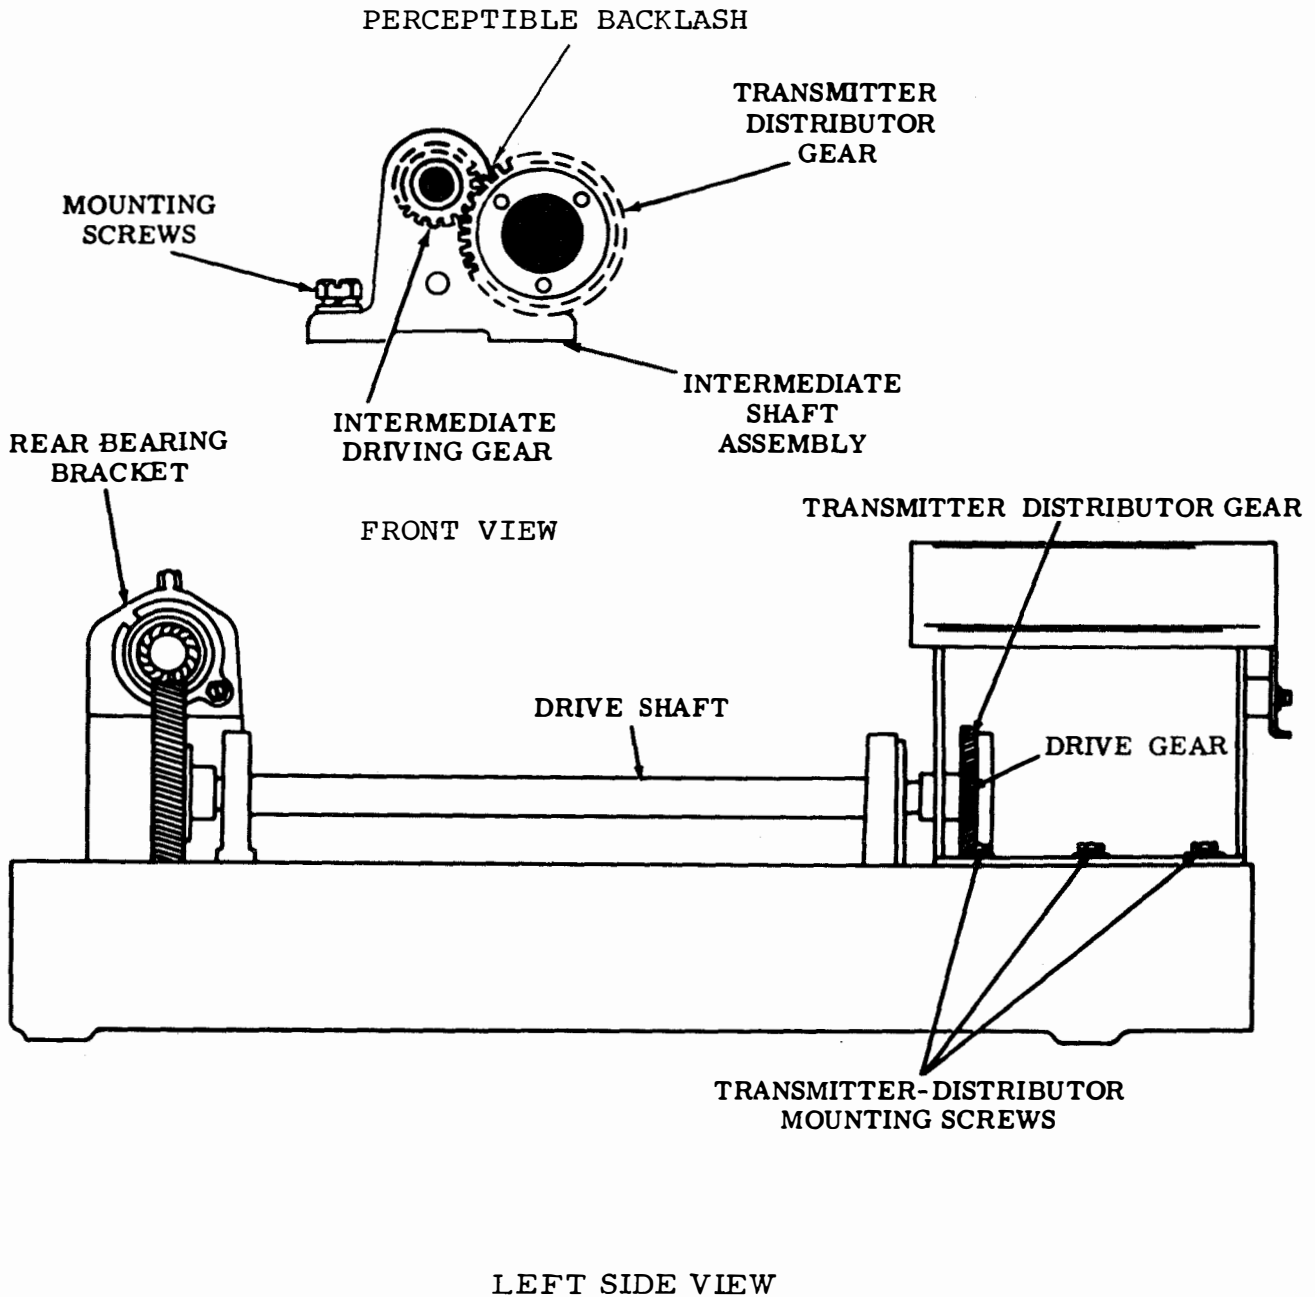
Intermediate Gear - Transmitter Distributor Gear Backlash
